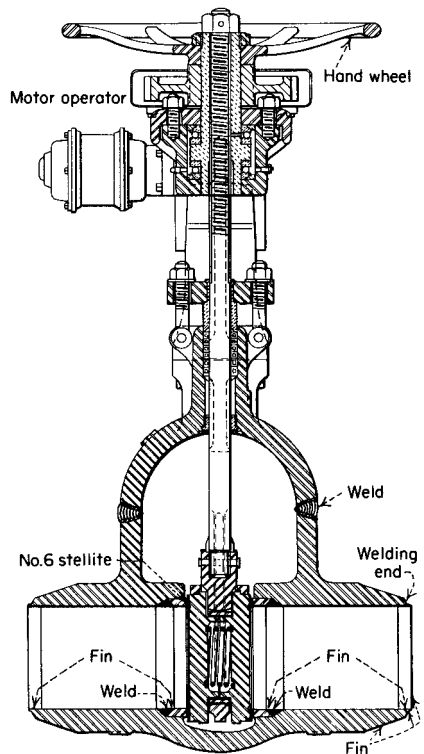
Parallel-seat gate valve showing welded construction for high-temperature service with welded-in seat ring.
